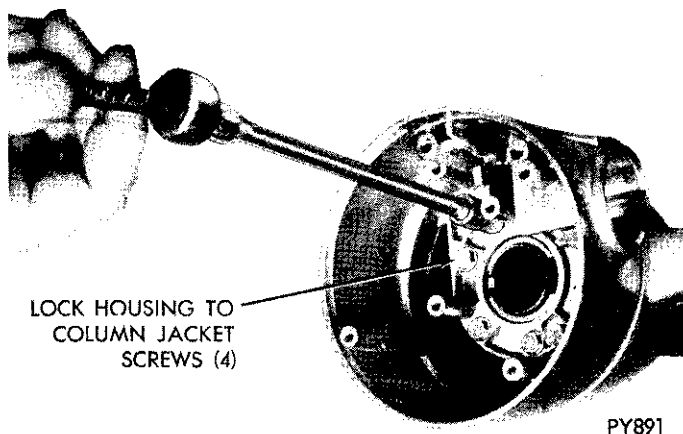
Lock Housing to Column Jacket, Retaining Screws
